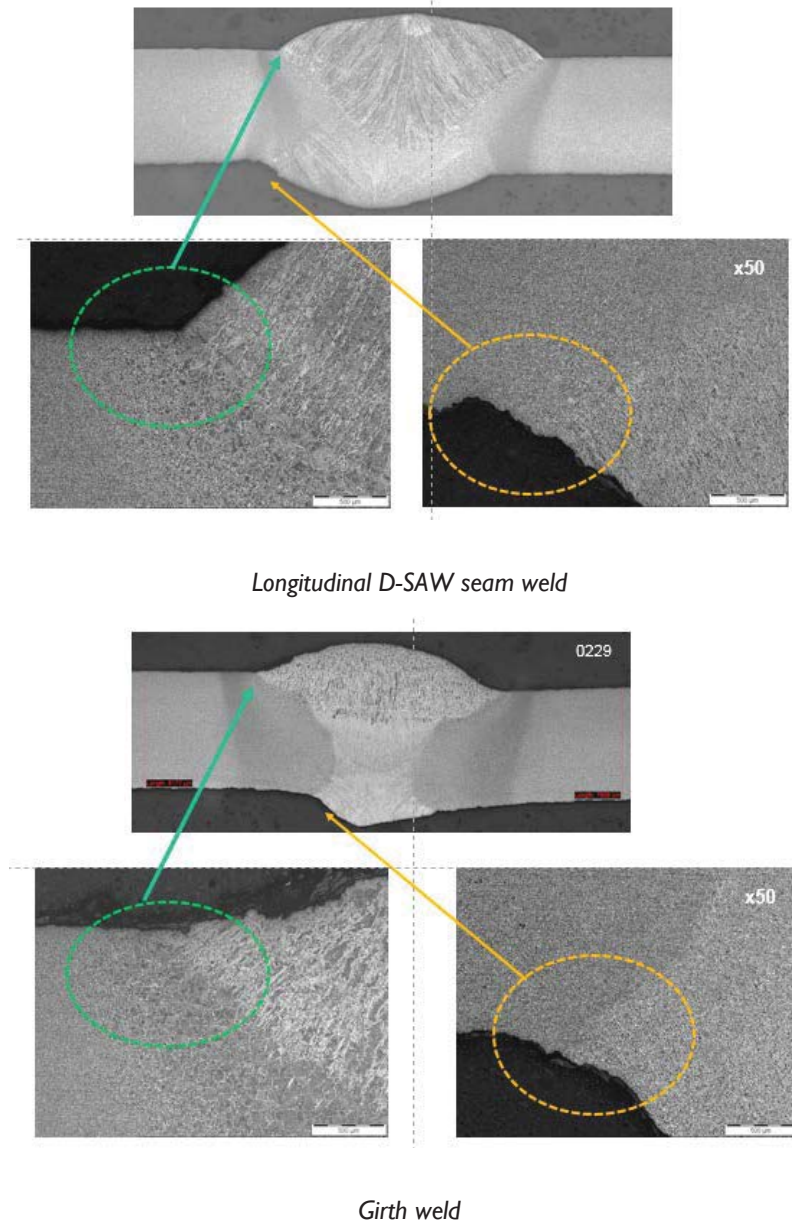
Typical macro (x5) and micro (x50) photographs of a longitudinal D-SAW seam weld and a girth weld.
